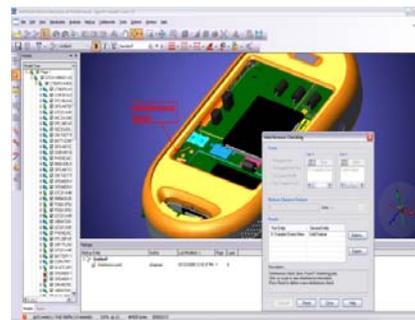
Combine 3D parts and ECAD designs into a single digital assembly
